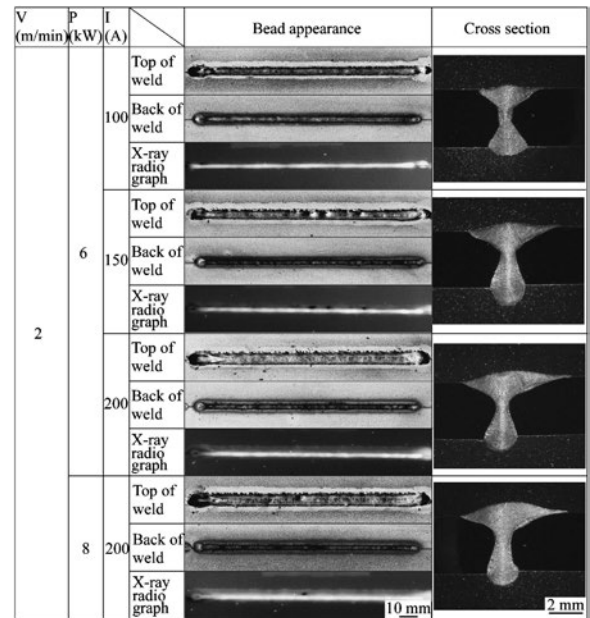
Surface appearances, X-ray radiographs and cross sections of Hastelloy C-276 hybrid welds.
